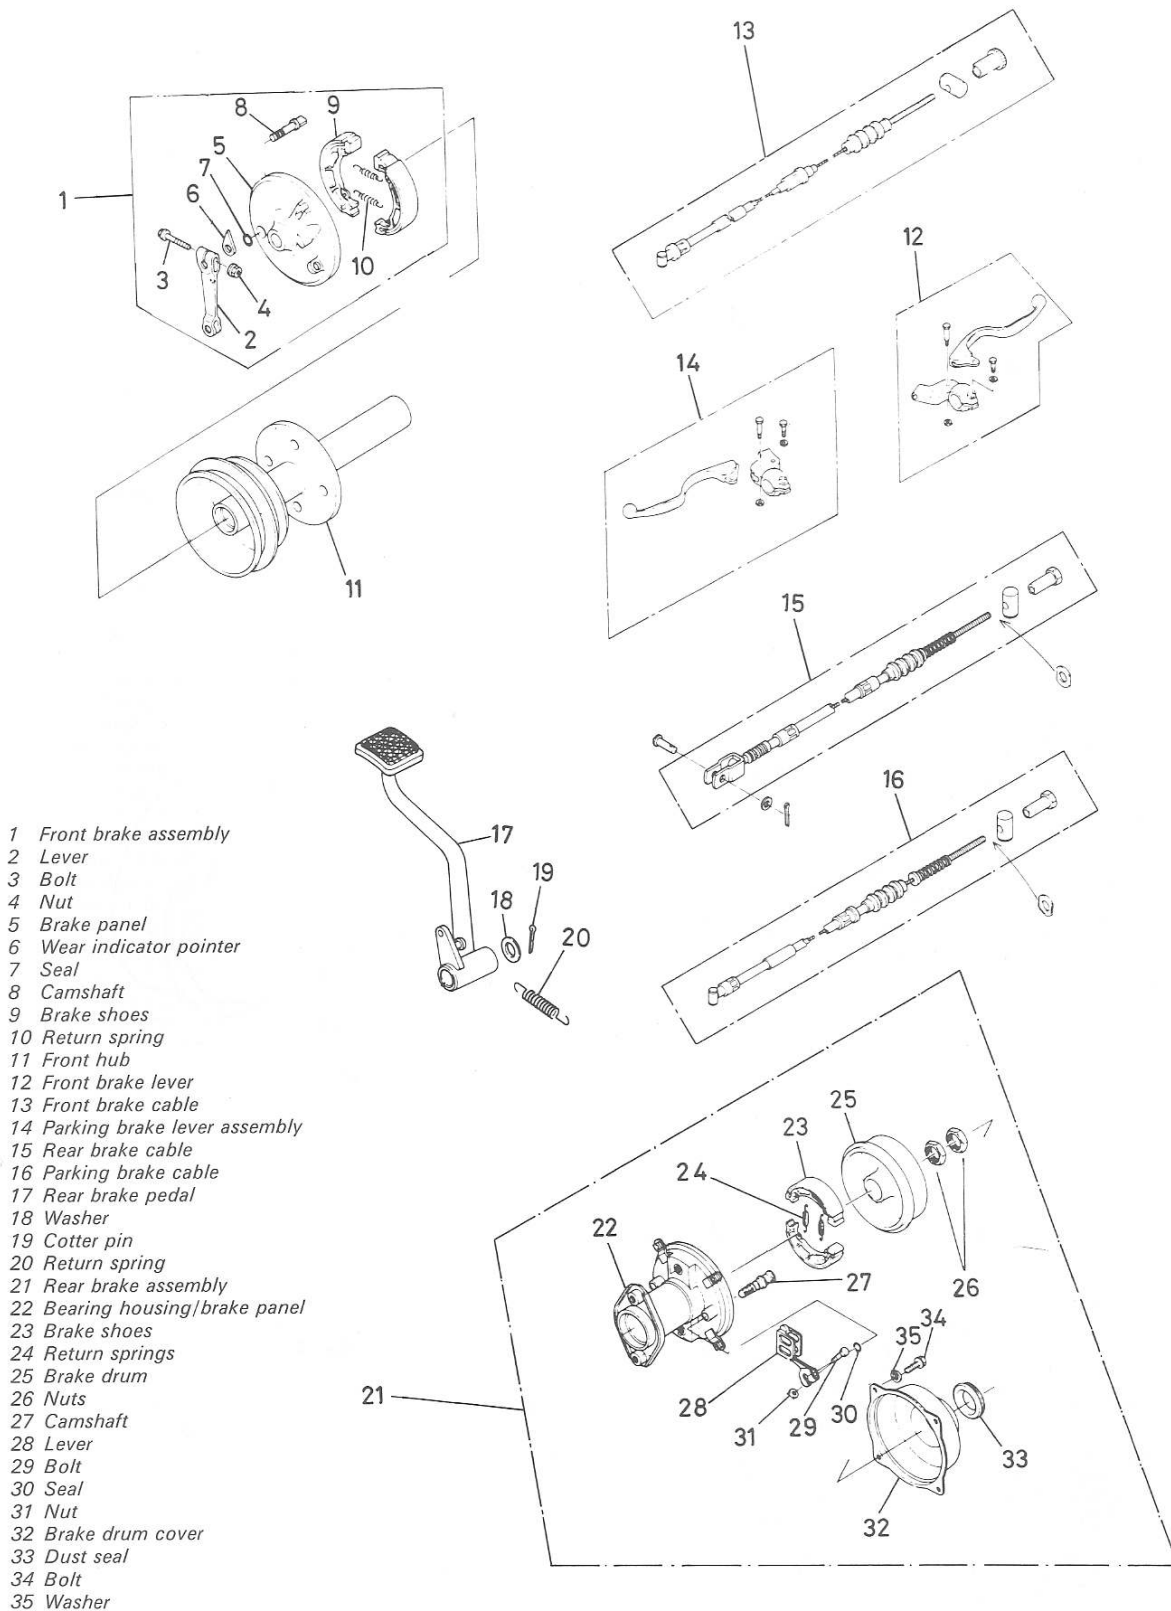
Brake components – KLT110 – KLT160 similar (Sec 6)
